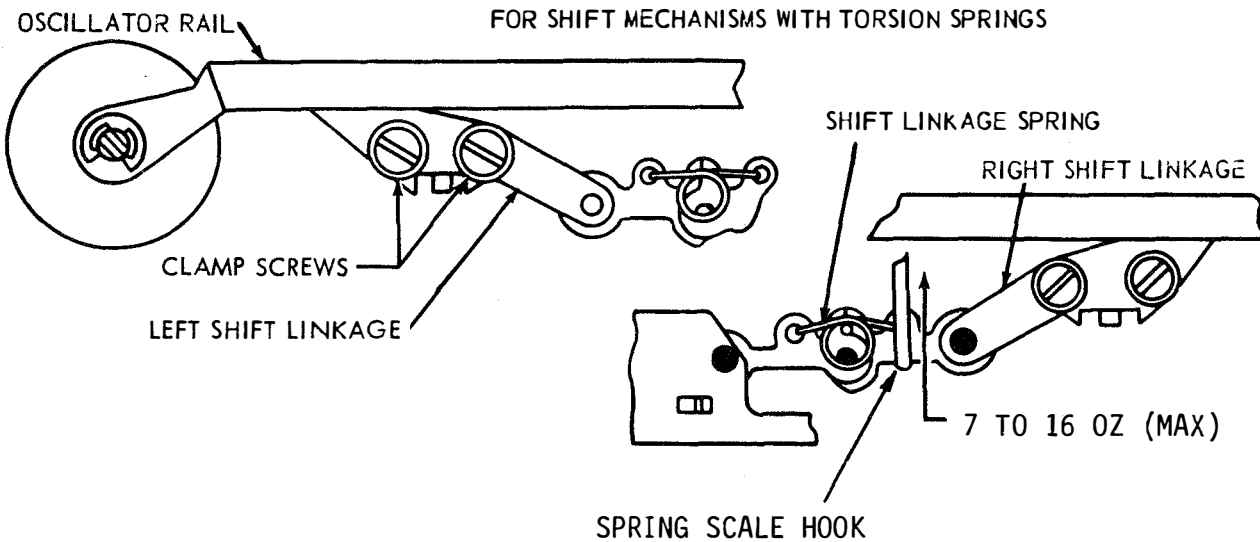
Shift Linkage Spring, Early Design, Front View
